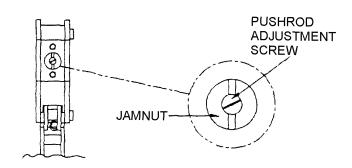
Adjustment of Safety Cable Indenter (Same for Hand and Pneumatic Tool Models)
